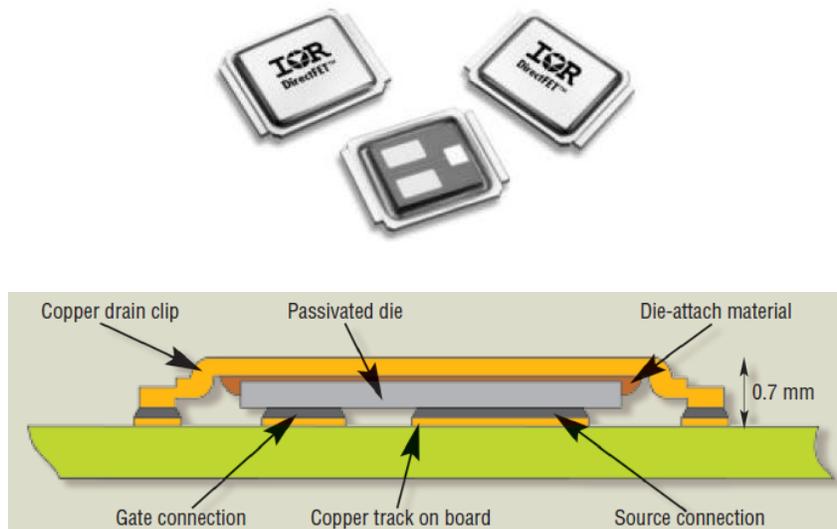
DirectFET™ package (above) and a cross section of DirectFET™ Technology (bottom) [6].
